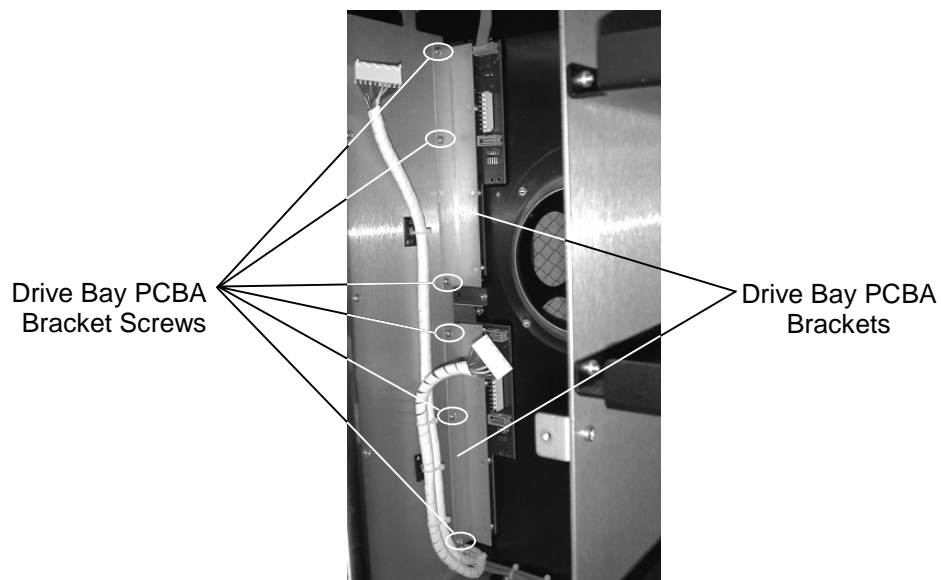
58xxx, 68xxx and 88xxx Models Left Side Drive Bay PCBA Brackets and Screws
